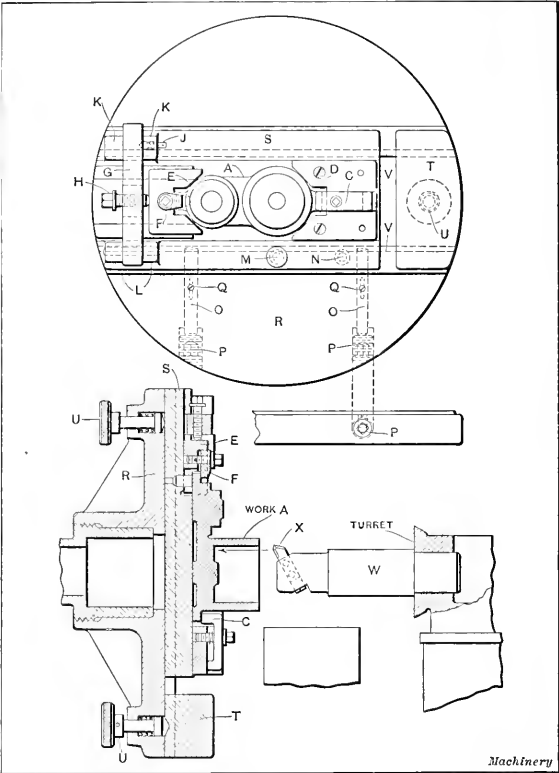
Fixture with Adjustable Slide and Counterbalance
